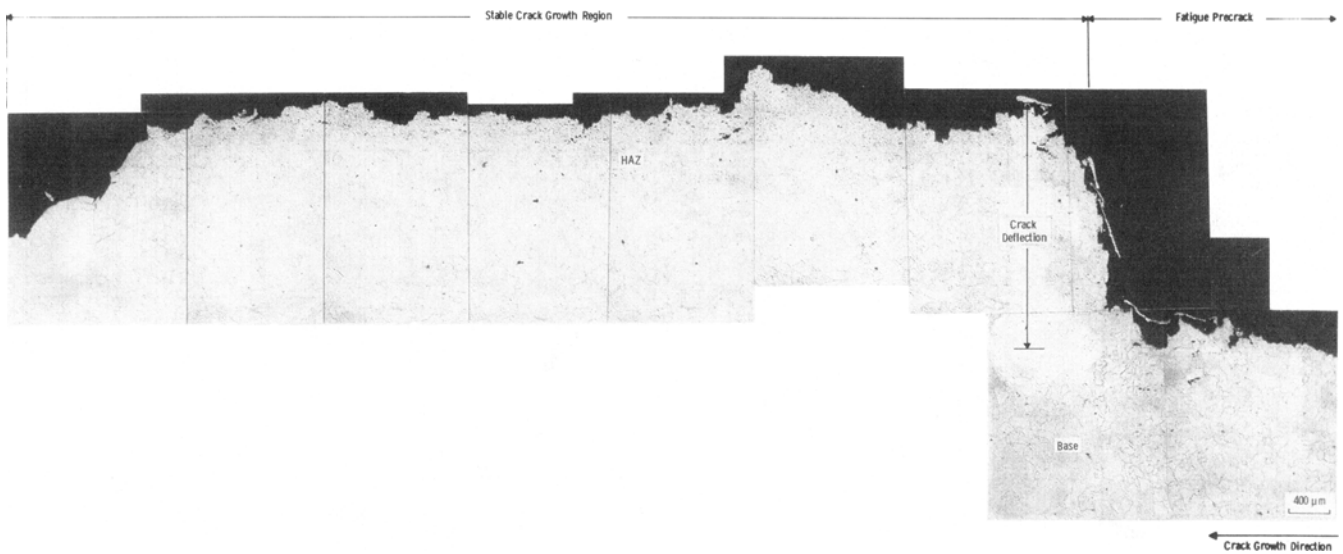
Fracture profile of 2-1/4Cr-1Mo steel weldment (HAZ metal: specimen WCW1A-J2H) tested at 593 °C (1100 °F).
